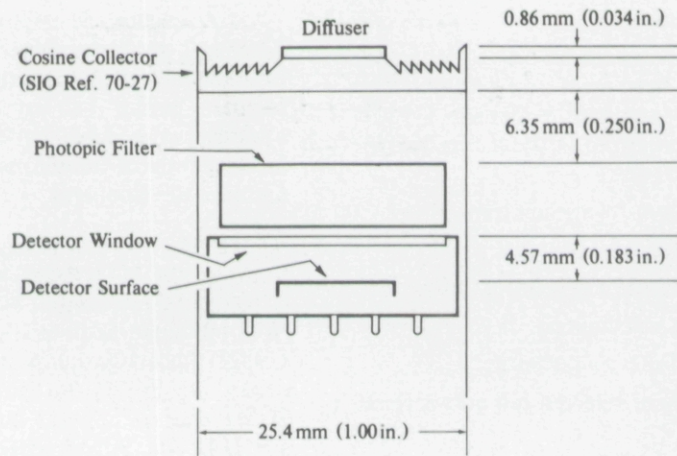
Prototype nephelometer receiver - integrating. Dimensions in millimeters (inches).
